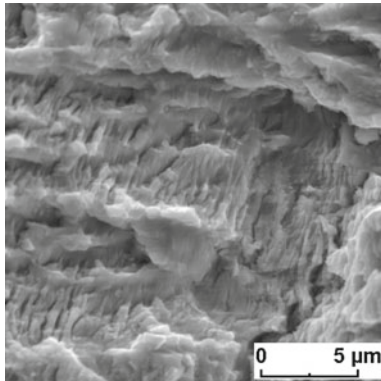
Fractographic view of a fatigue fracture of steel C15
